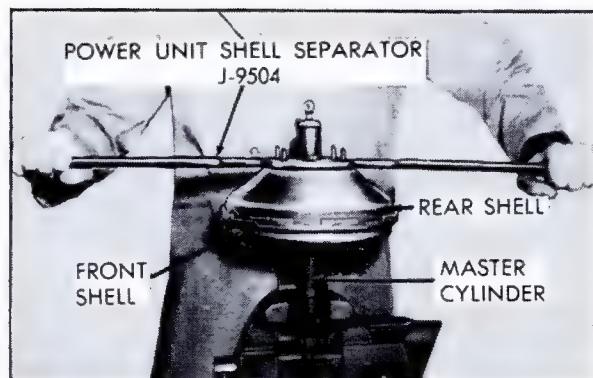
Removing Rear Shell - Single Diaphragm
